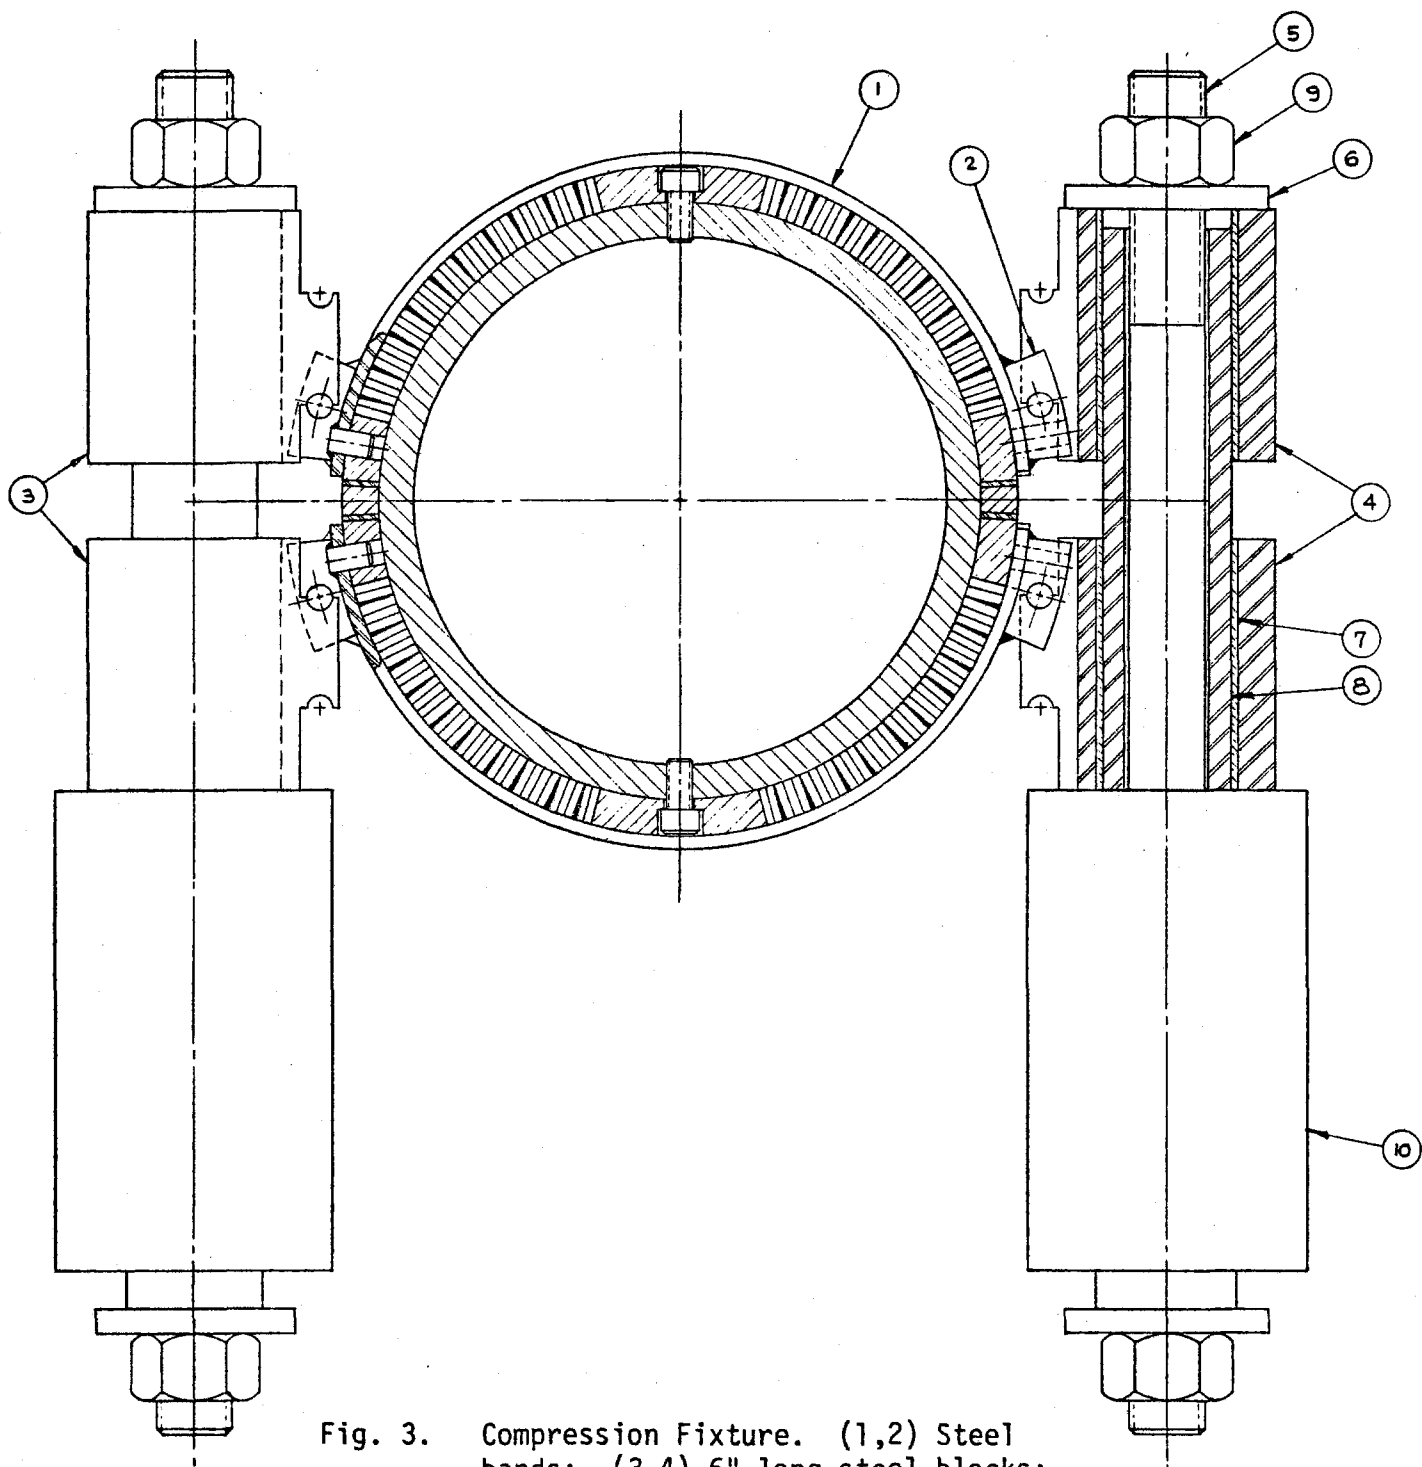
Compression Fixture. (1,2) Steel bands; (3,4) 6" long steel blocks; (7) bronze bushing; (8) hardened steel shaft to resist bending moment; (10) hollow core hydraulic cylinder.
